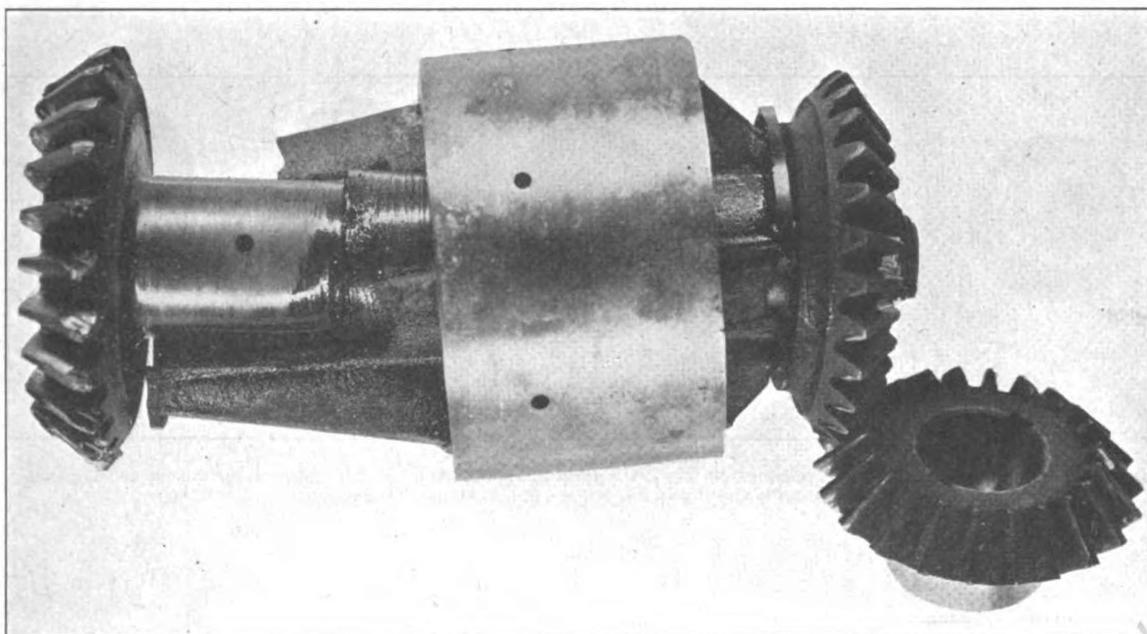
Burnt bearings oil and water pump gear assembly. This failure occurred during the preliminary runs on the dynamometer.
